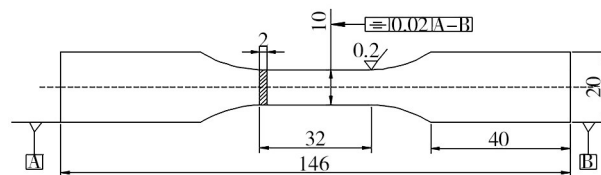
0Cr18Ni9 stainless steel sheet (2 mm) welded joint tensile specimen
